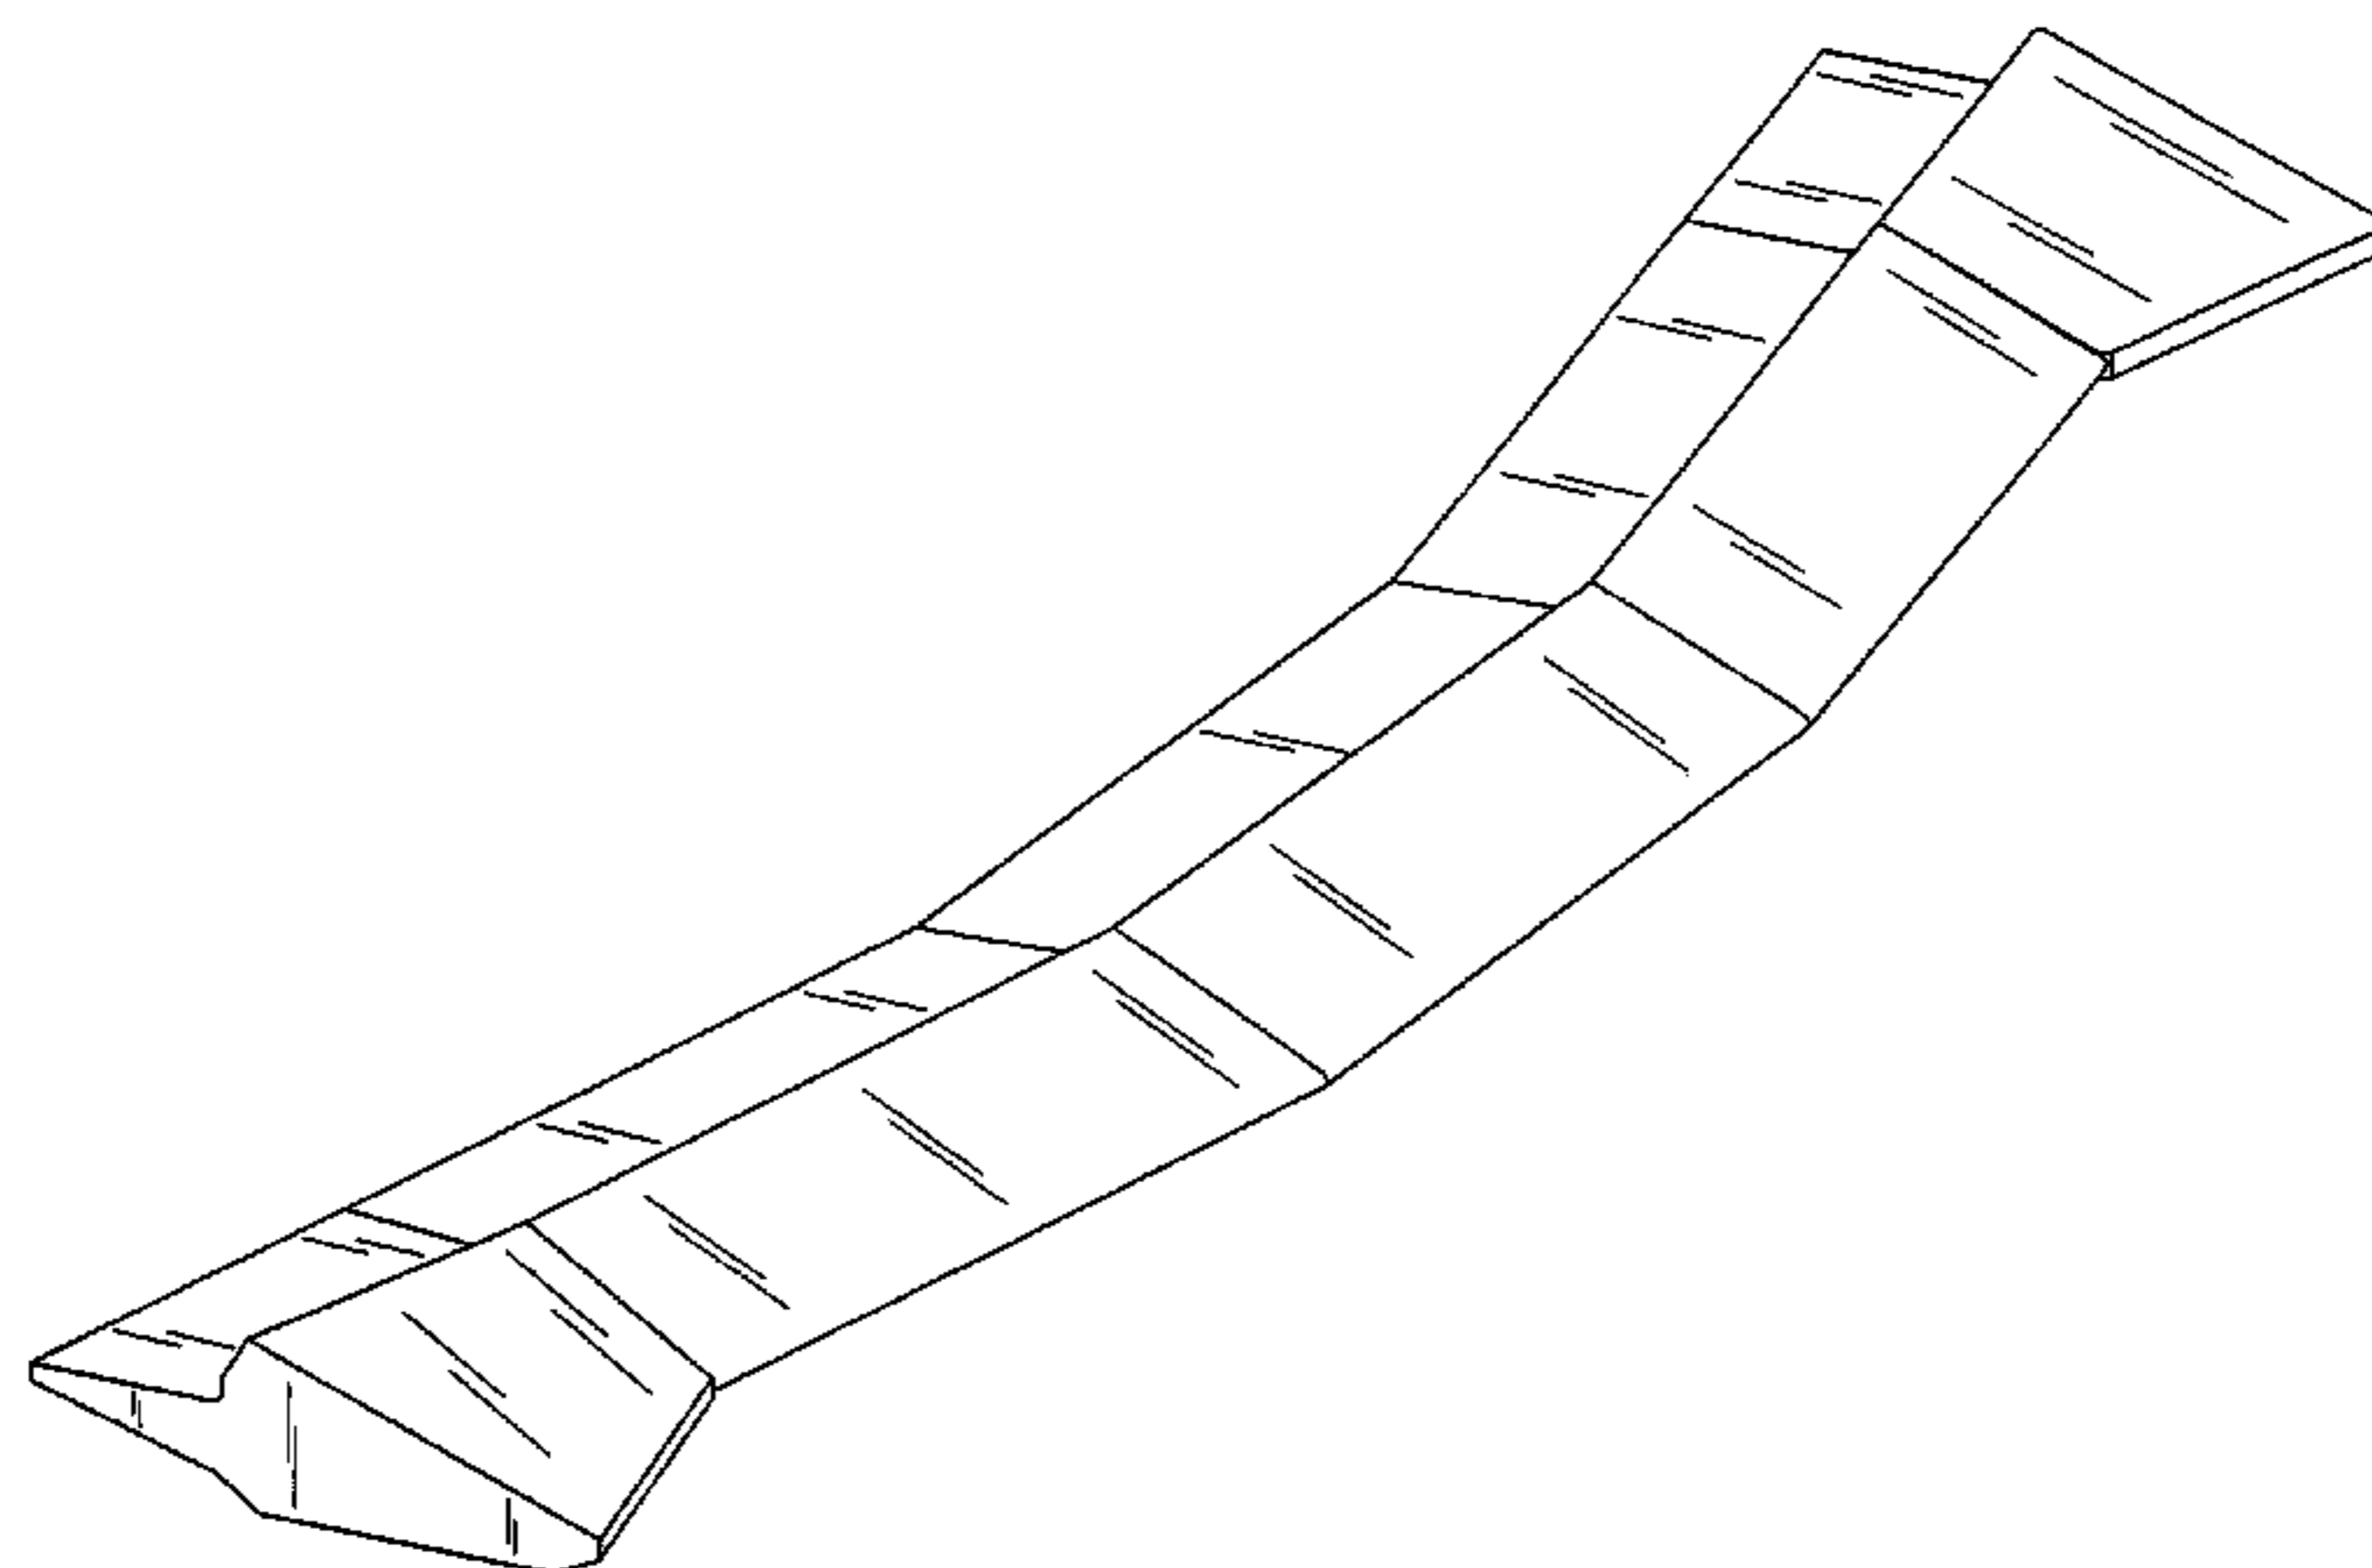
is an enlarged right side view of the bucket base edge shroud system.
